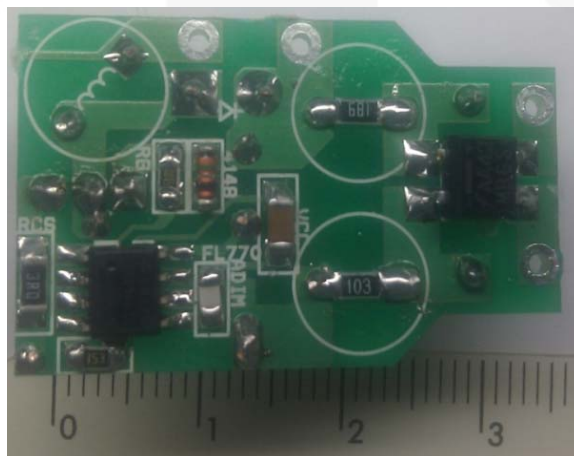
Photograph Bottom View (20 mm x 32 mm x 13 mm)
